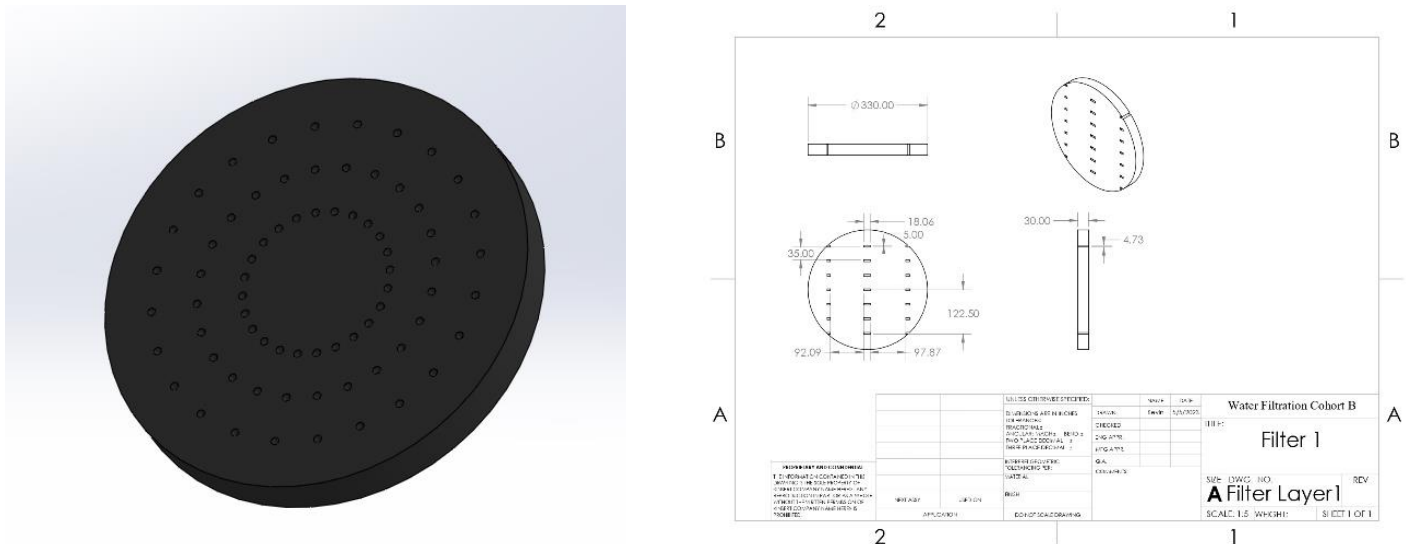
Filter CAD Model (left) and Technical Drawing (right)
